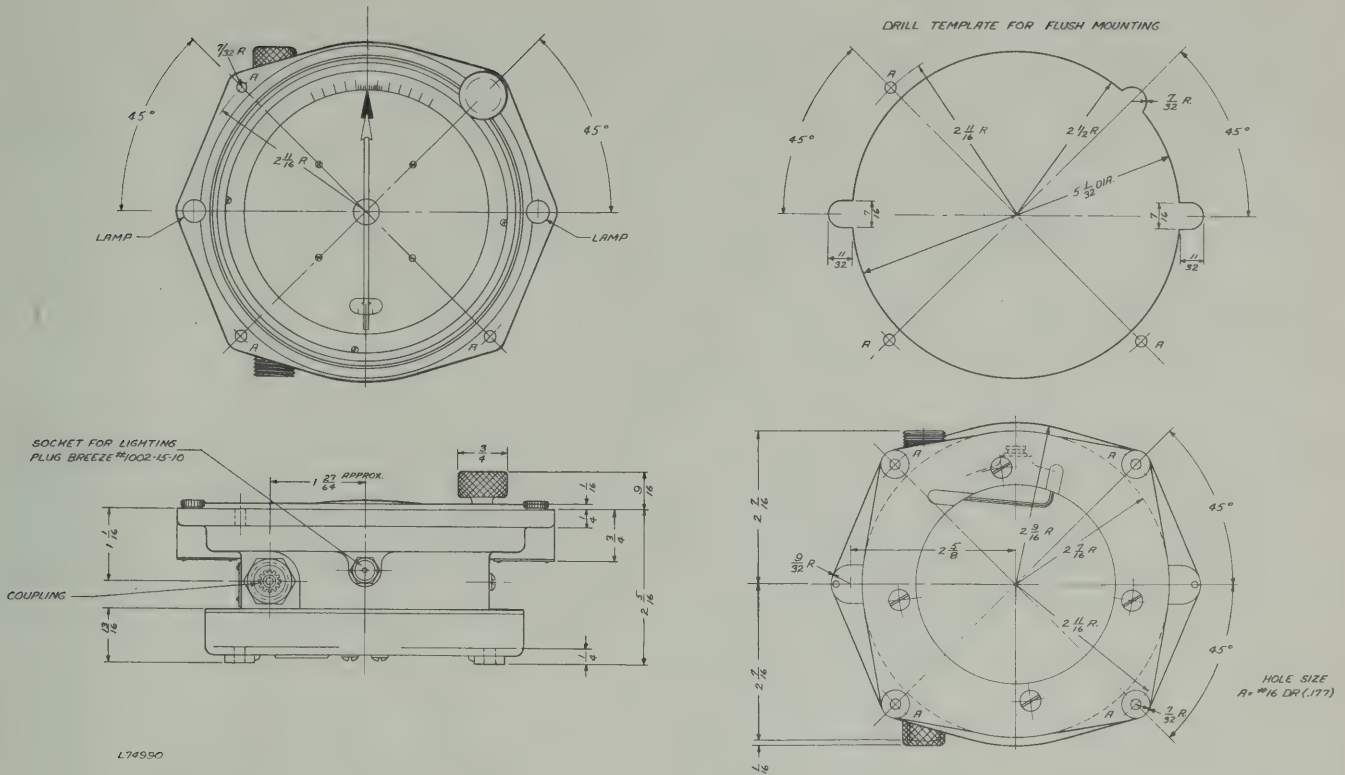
TYPE MN-40D AZIMUTH INDICATOR, OUTLINE AND MOUNTING DIMENSIONS
